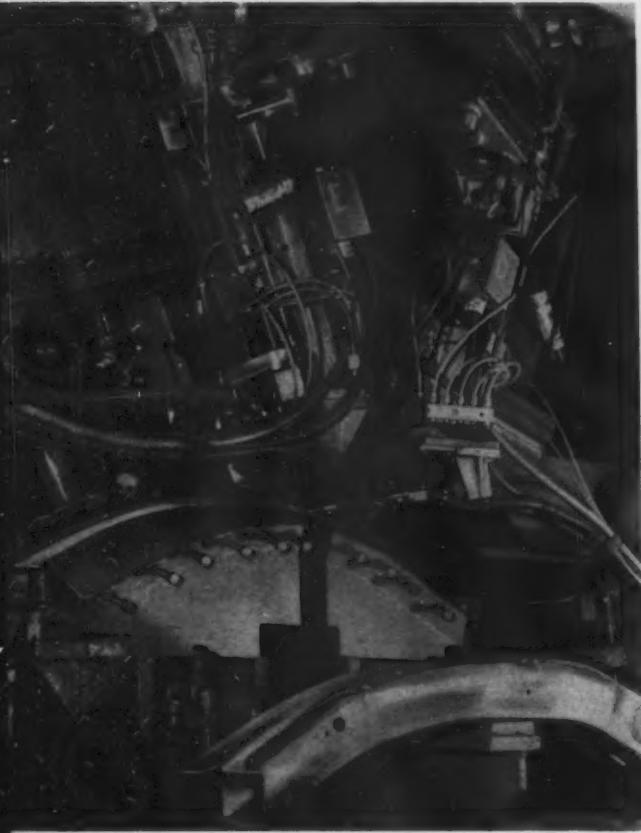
Four heads on this automatic machine contour-weld two channel-shaped stampings into a box-section for the No. 2 cross-member.
